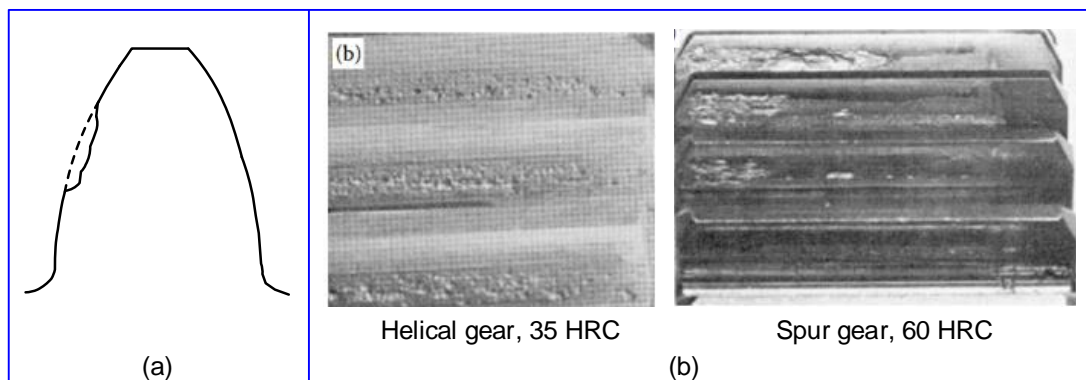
Pitting: (a) Pitting form of plastic gears (after [26]), (b) Photographs of pitting on iron gear teeth (after [2])
